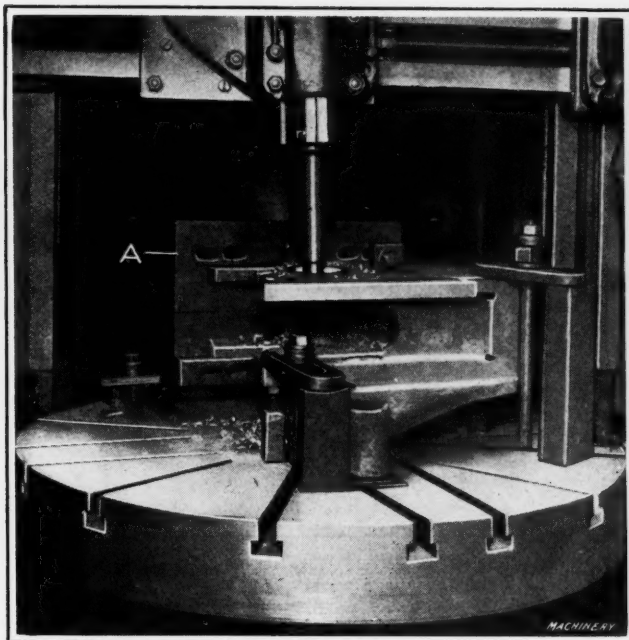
Boring the Wrist-pin Hole in a Cross-head
